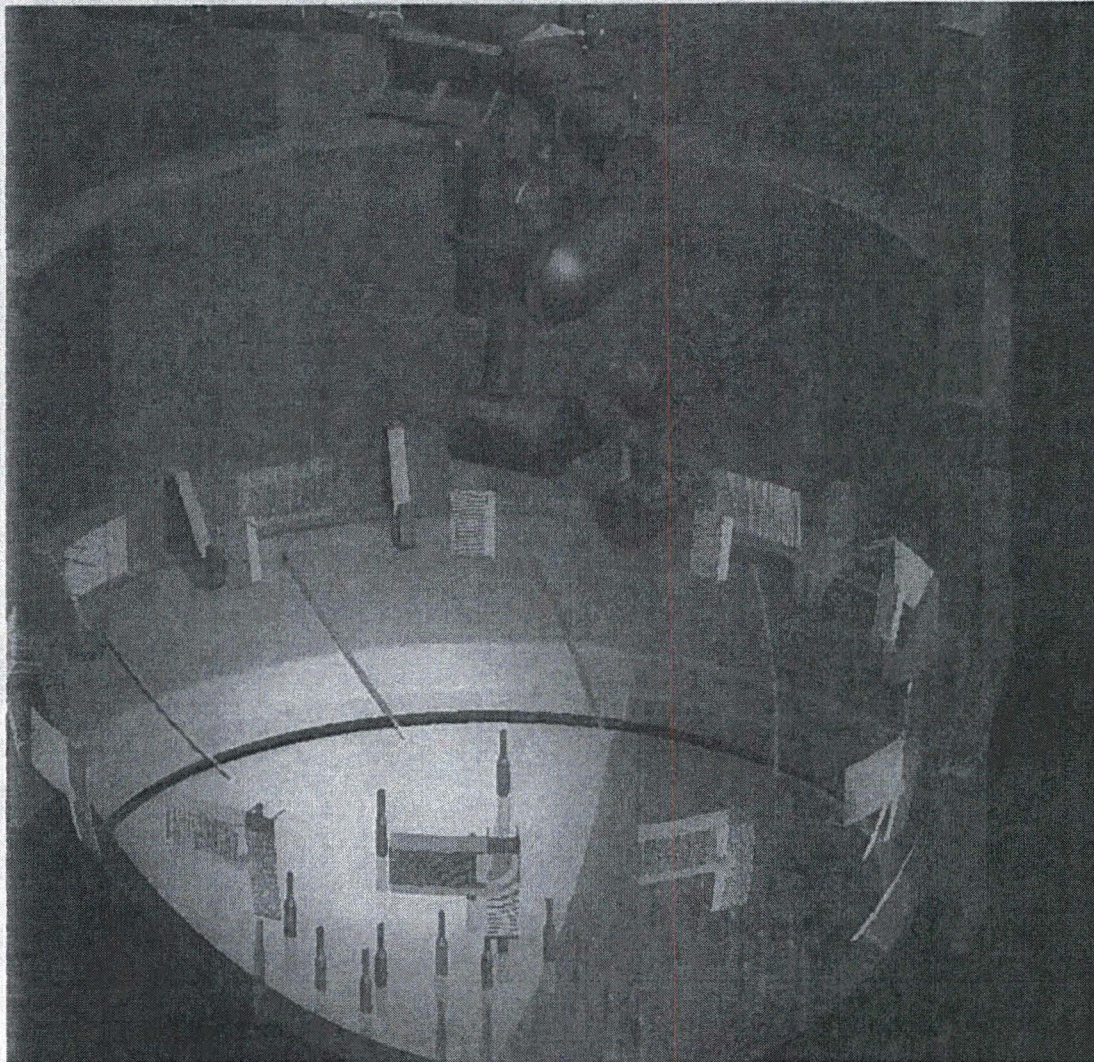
TWS Weld W05 – Lower shell to Lower Head Weld
